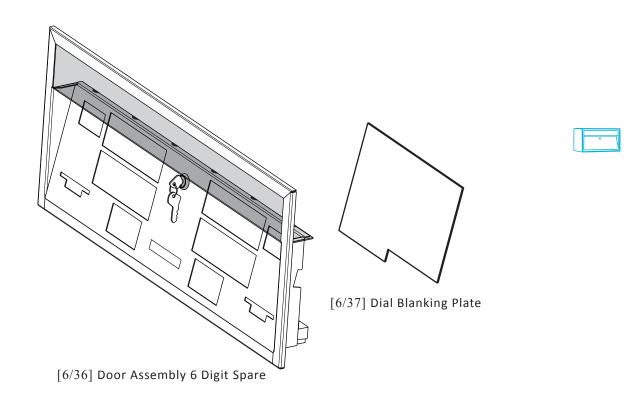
Head Cabinet Door Assembly and Blanking Plate
